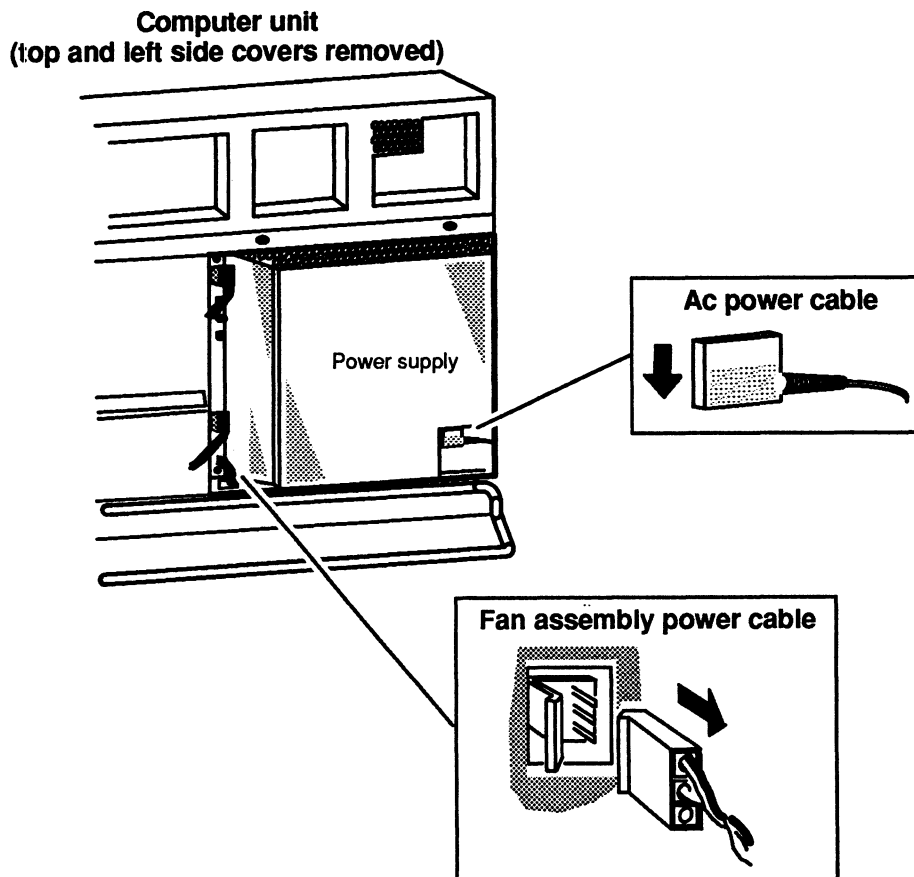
Unplugging the Ac Power and Fan Assembly Power Cables from the Power Supply
